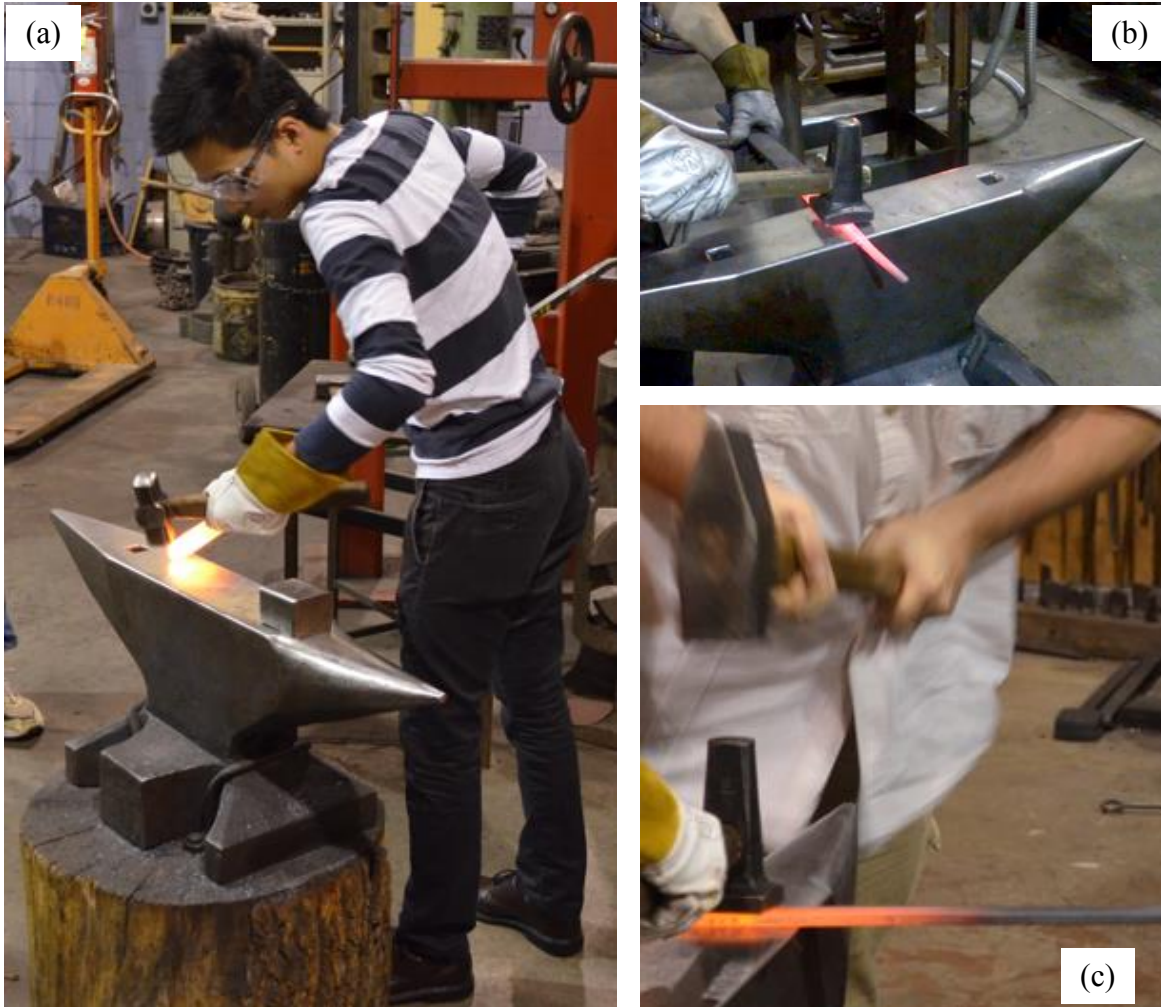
Forming the strip into a blade by Hand. (a) Forming the tip; (b) forming the handle's tang; (c) and forming the edge.
